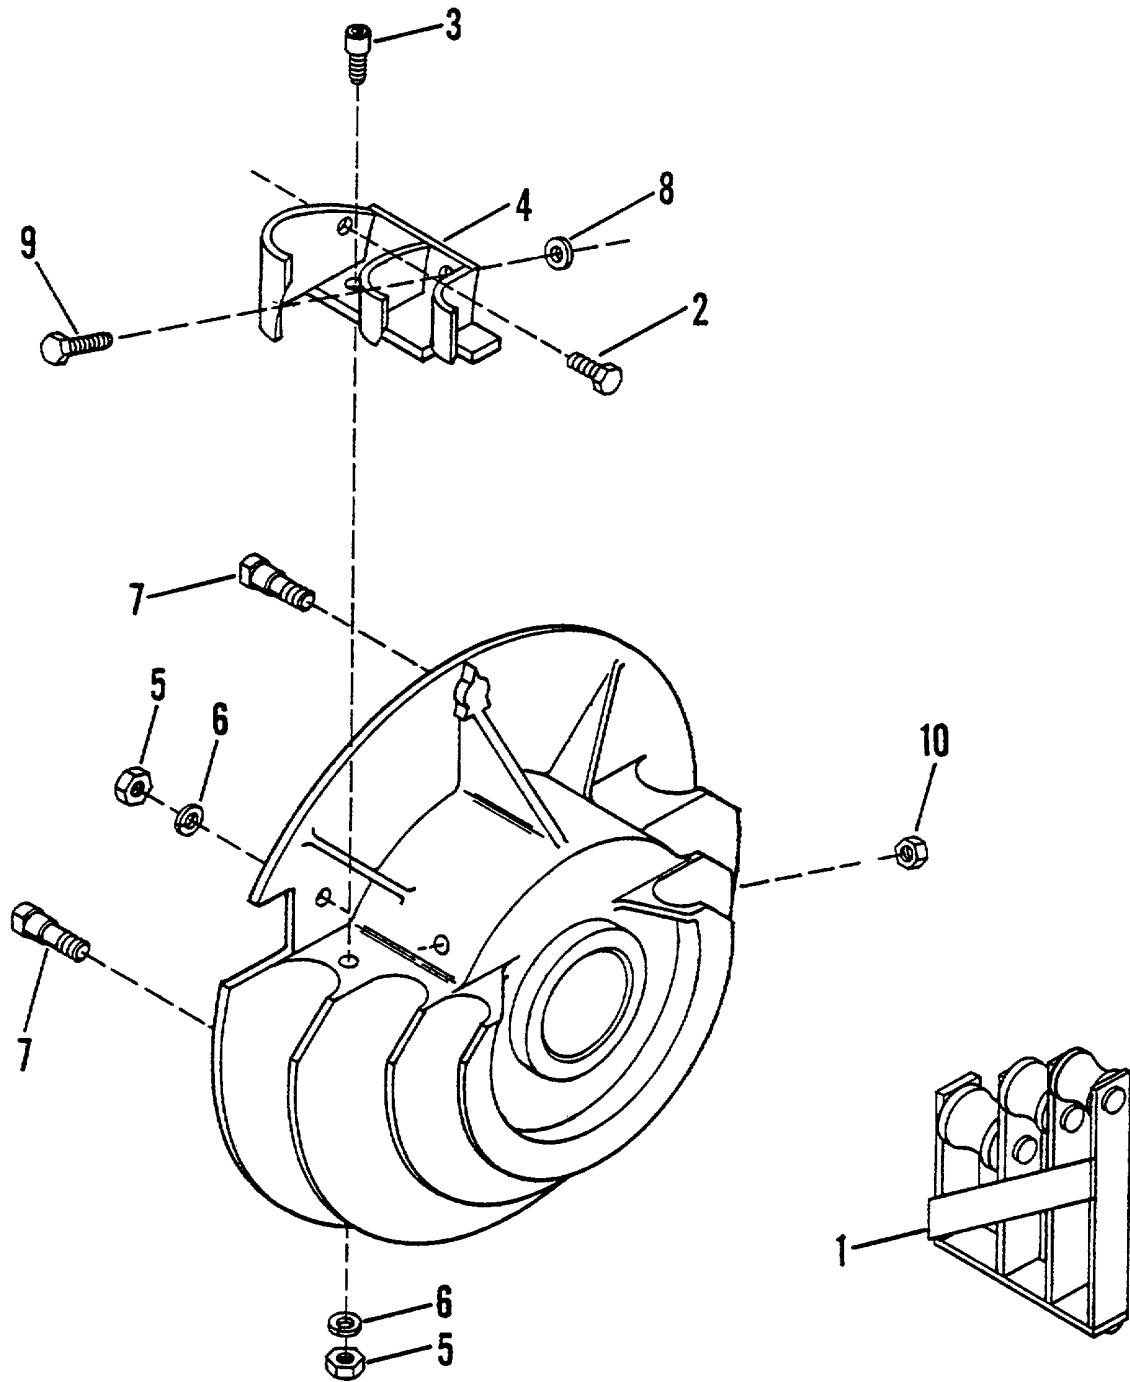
Bending Shoe & Support Roller 1/2-1-1/4" Rigid Conduit
